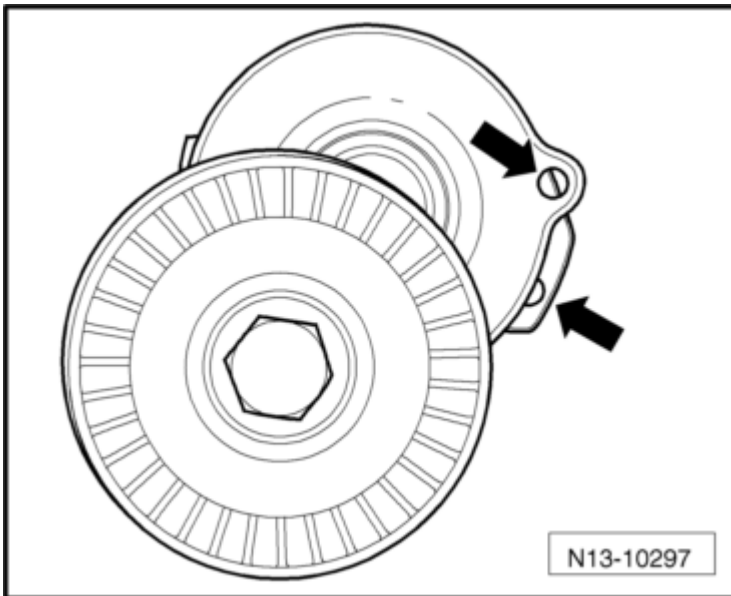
Identifying Alignment Of Holes To Secure Tensioner Using Locking Pin
